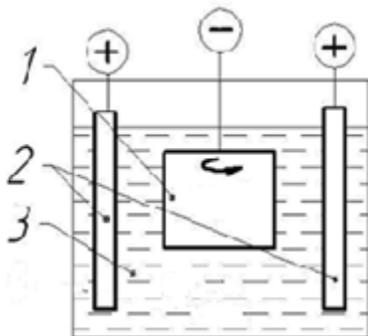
Schemes of galvanic metallization with full immersion of the EI casting: 1 – EI Casting; 2 – electrodes; 3 – electrolyte bath
